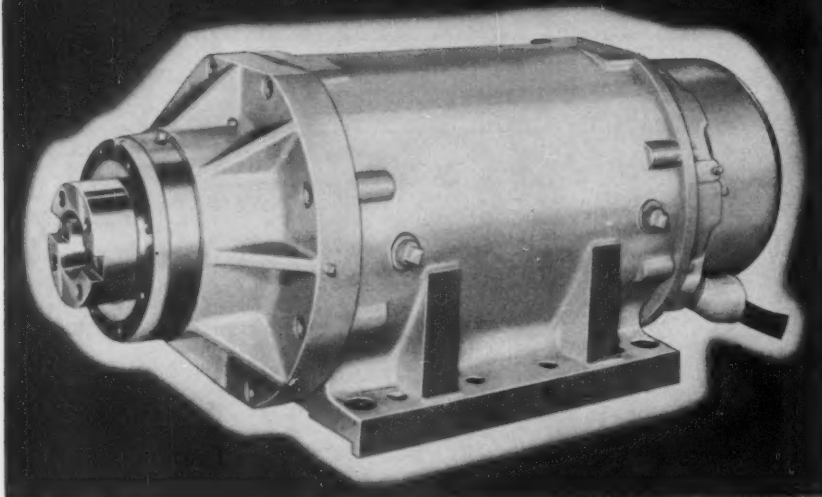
Liquid-cooled, special-purpose motor for skin and spar millers producing aircraft parts. Built in the 50 to 100-hp range, this two-speed motor is designed with superprecision ball bearings, precision machined foot slides, oil-mist lubrication, and integral brake (Louis Allis Co.)
